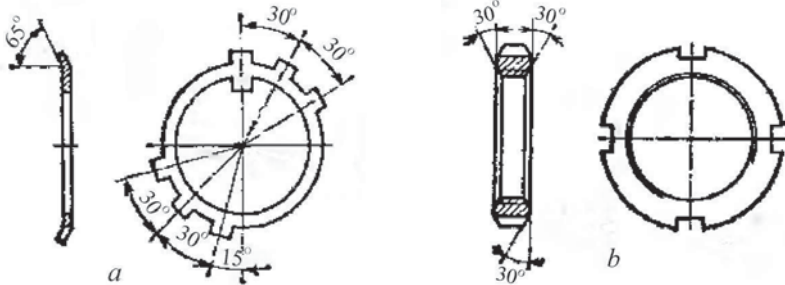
General view of lock washers (*a*) and nuts (*b*) intended for fastening rolling bearings on shafts [15]
